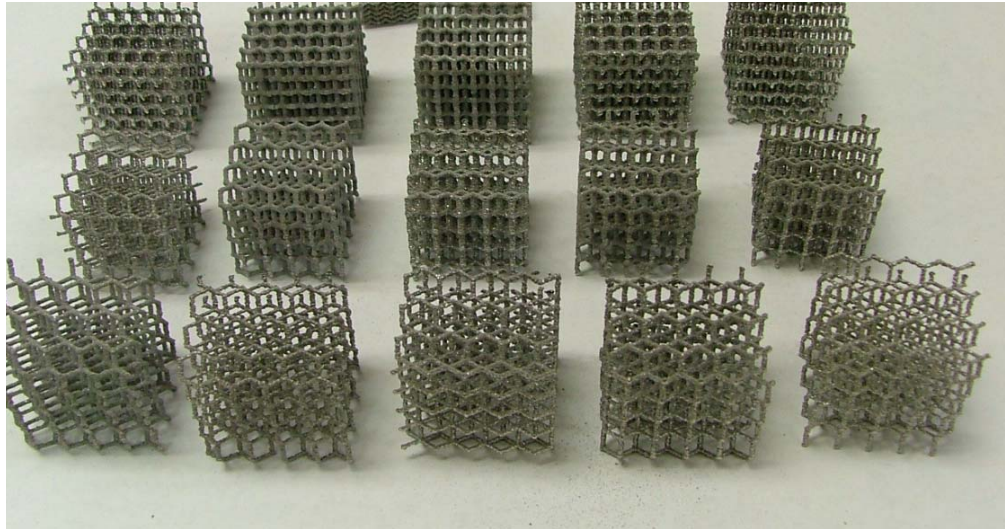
Compression Specimens with 4 mm, 5 mm, and 6 mm Unit Cell Dimensions
